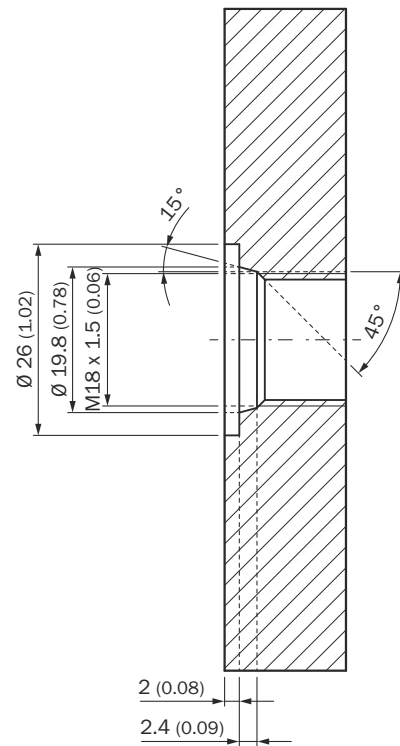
Threaded bore M18x1.5 according to ISO 6149, 15.3x2.2 O-ring
